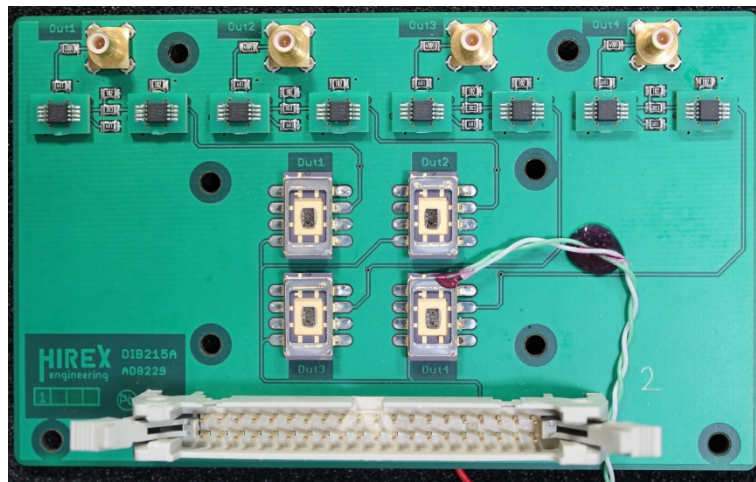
Photo of daughter board with 4 samples prepared for testing
